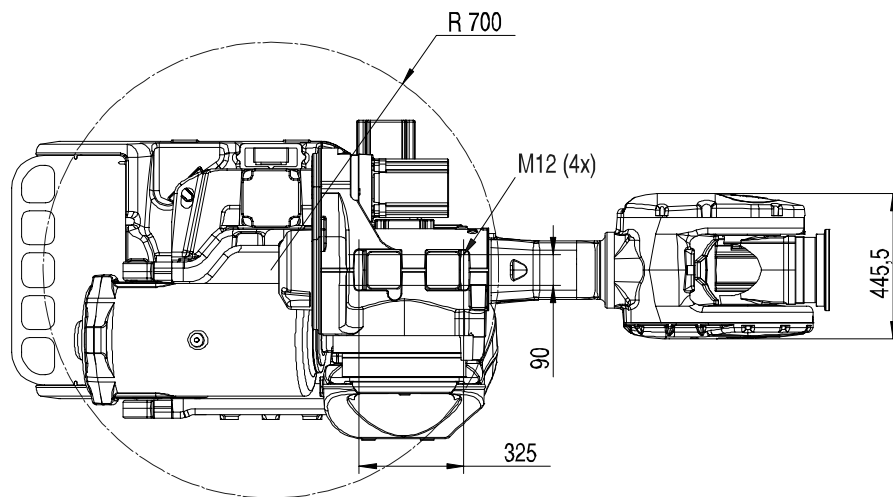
Holes for mounting of extra load on the upper arm (dimensions in mm).
